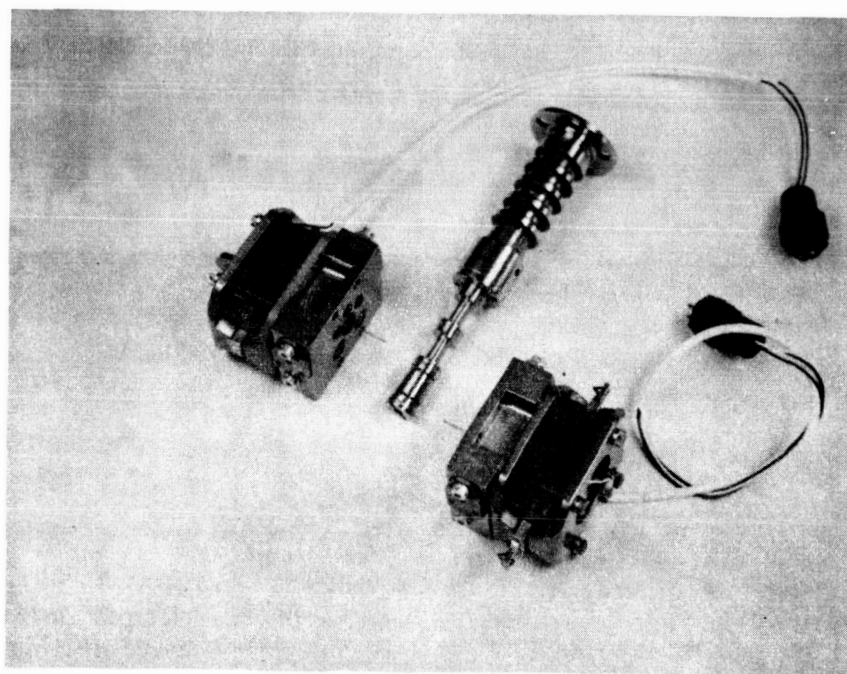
Detail Parts: Torque Motor Assemblies and Valve Spool - Bushing Assembly
